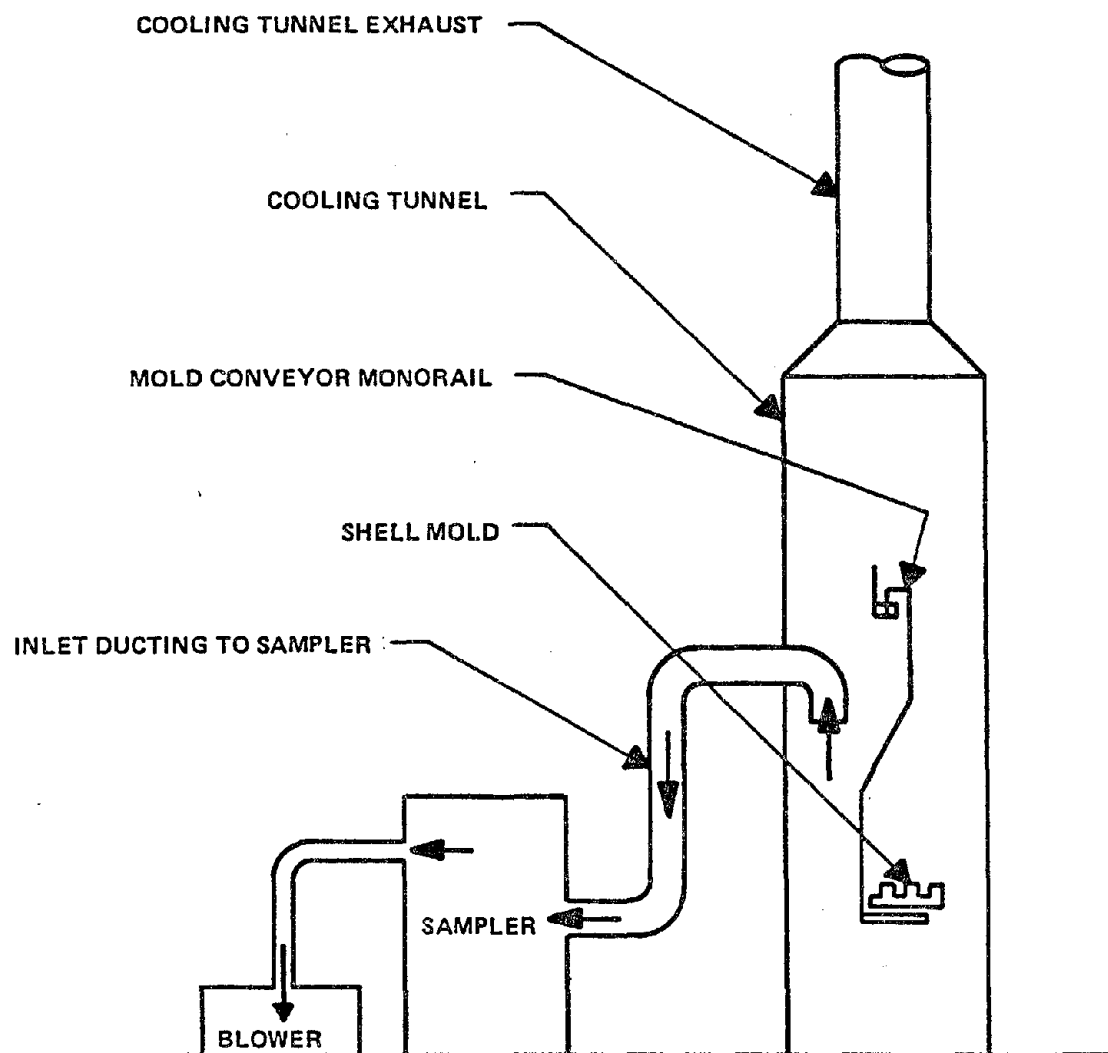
SHELL MOLDS – END VIEW OF COOLING TUNNEL
